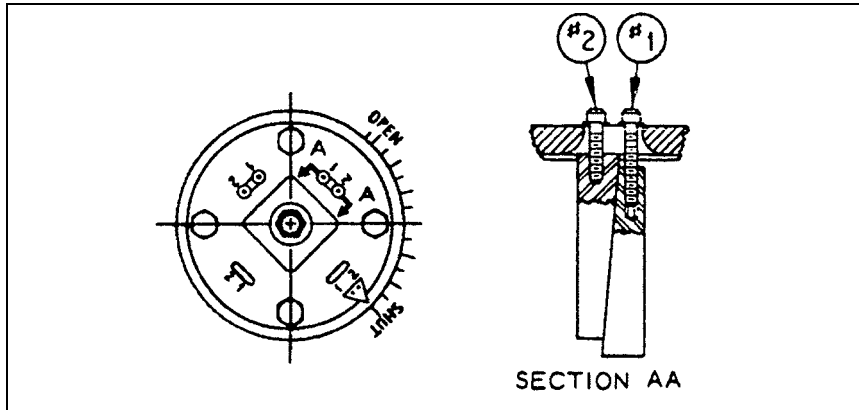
24" thru 36" Key and Lockscrew Arrangement
